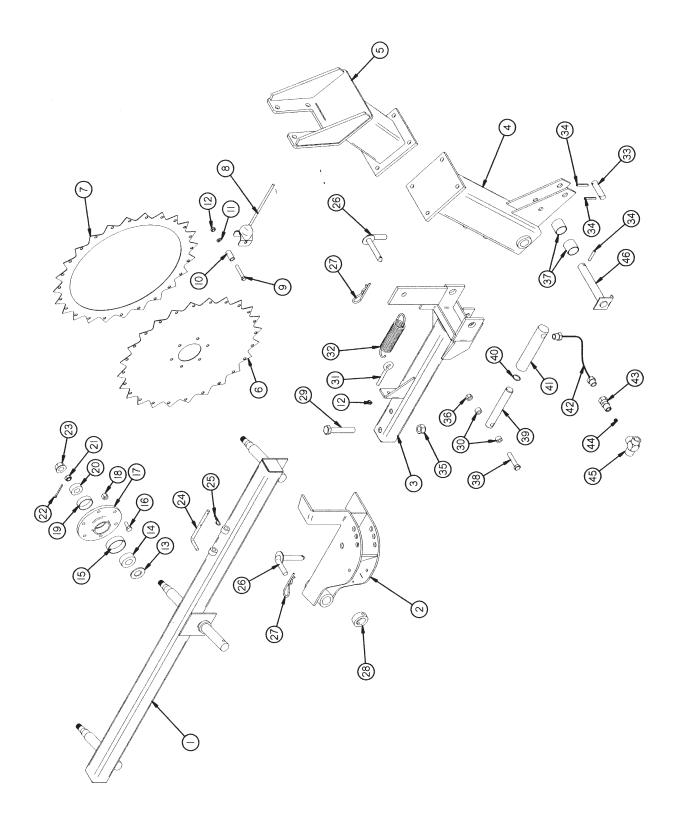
1460-1660 HI-CAPACITY RAKE OPTIONAL 3-WHEEL KICKER WHEEL
